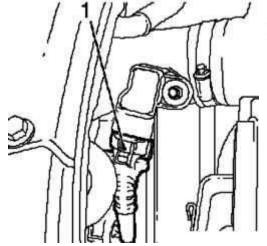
Sensor wiring harness connector boost pressure: 1 - connector
